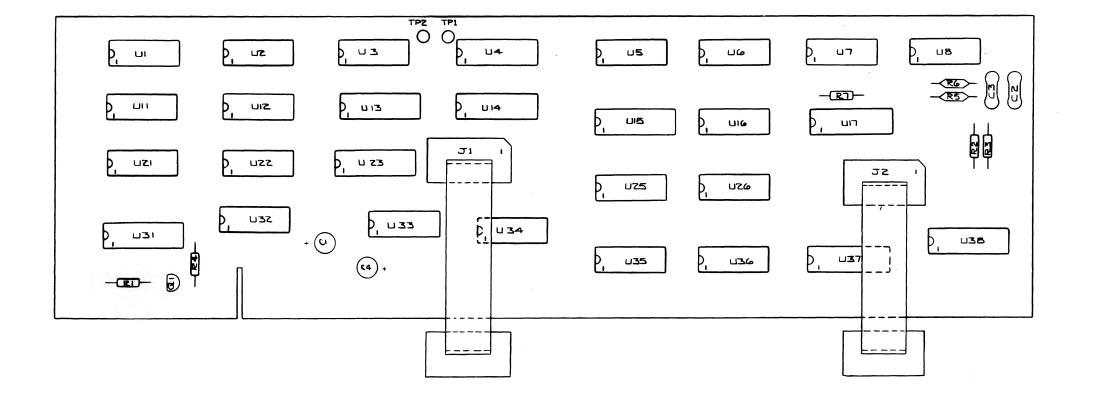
A10A1 Analog Display PCB Assembly (cont)
